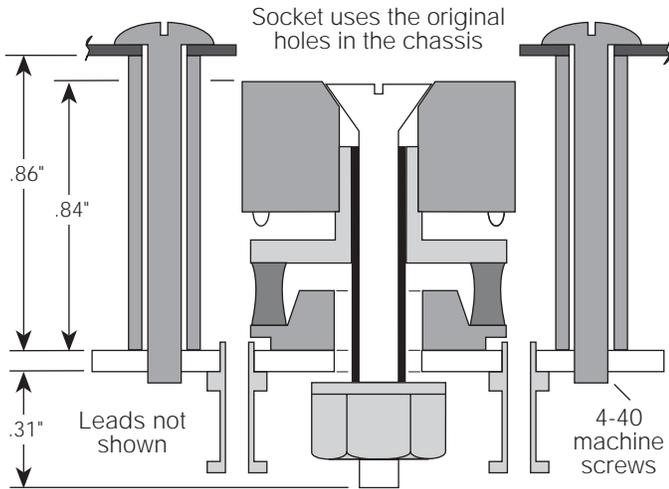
The standard profile, chassis mounting, vertical ISO-SOCKET is shown above. The contacts are silver plated brass, the socket body is white ceramic and Sorbothane is used for the decoupling elastomer. The socket is supplied fully assembled with the flex leads threaded through the holes in but not soldered onto the hollow, turret terminals. Note that the insulation on the leads is solder strippable. See AN 7.1 *ISO-SOCKET Installation Instructions* for complete directions on the method to use to dress the leads.
